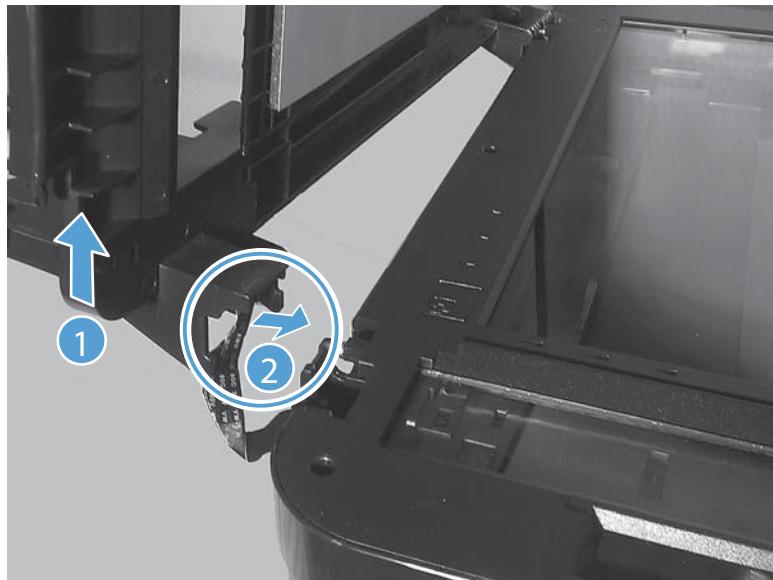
Remove the document feeder base assembly (2 of 4)
